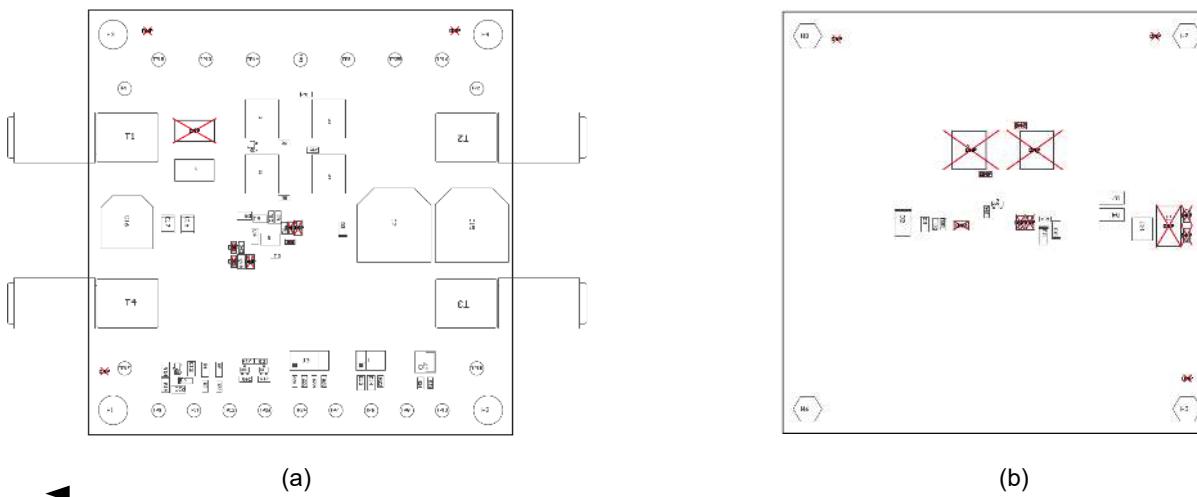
TPS48111Q1EVM Board (a) Top Assembly (b) Bottom Assembly
